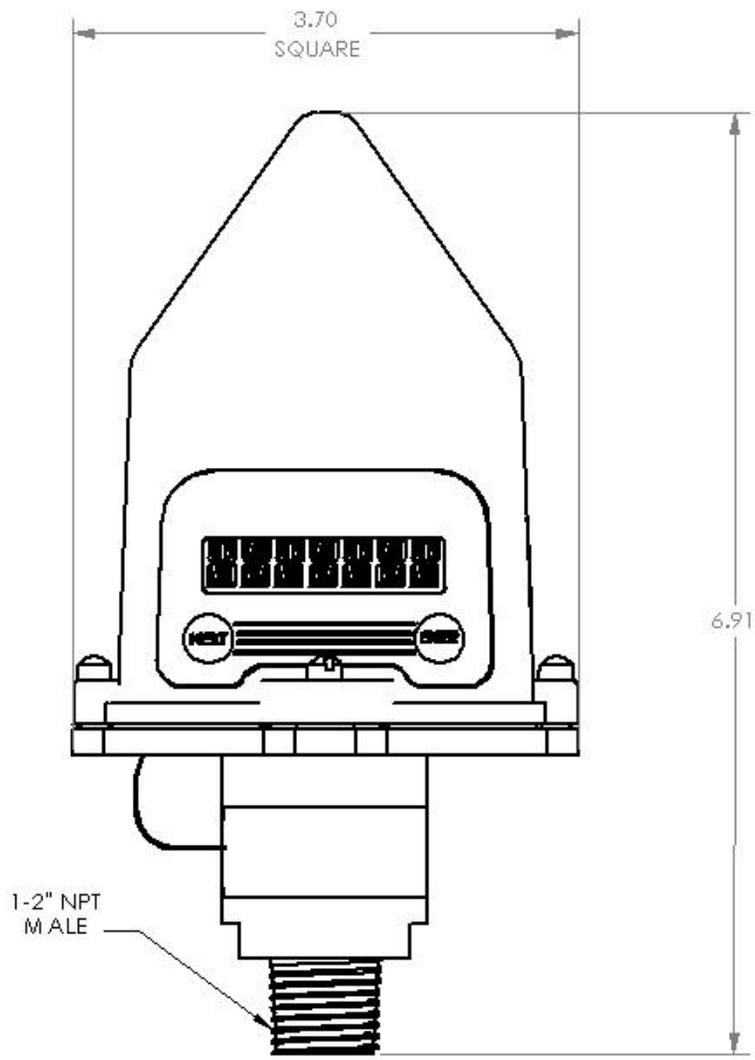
WI-GL-I-XX Dimensioned Mechanical Drawing
